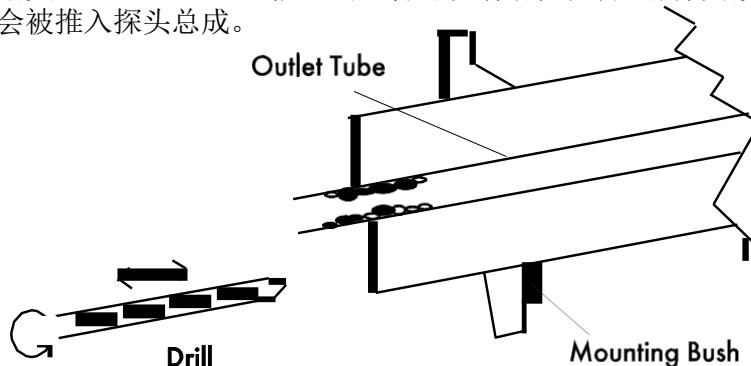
i Diagram to Show Method of Cleaning a Blocked Outlet Tube
